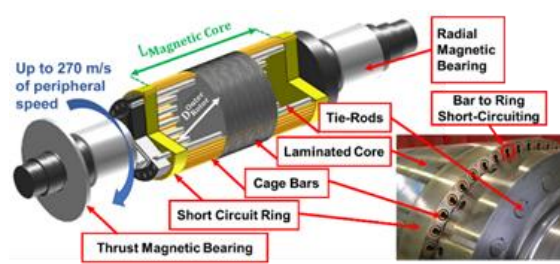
High-speed laminated squirrel cage rotor technology with active magnetic bearings.
